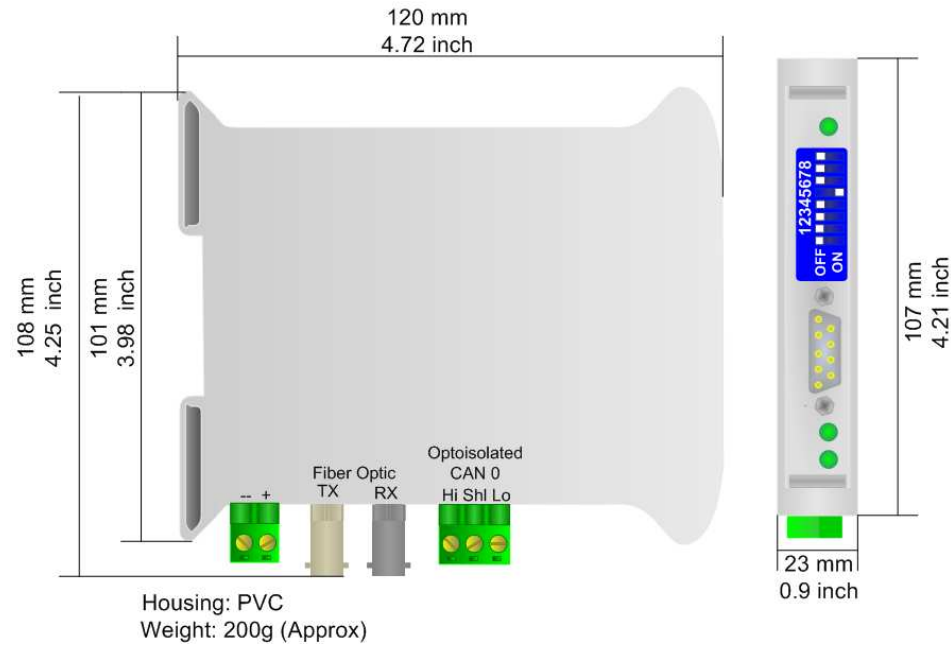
Mechanical Dimensions Scheme for HD67XXXFS
